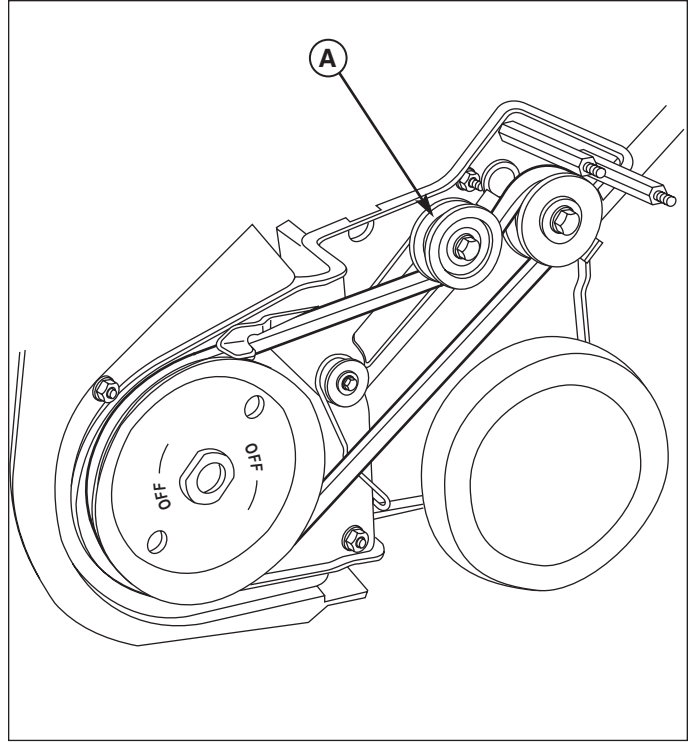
Auger Drive Belt Idler Pulley Adjustment
